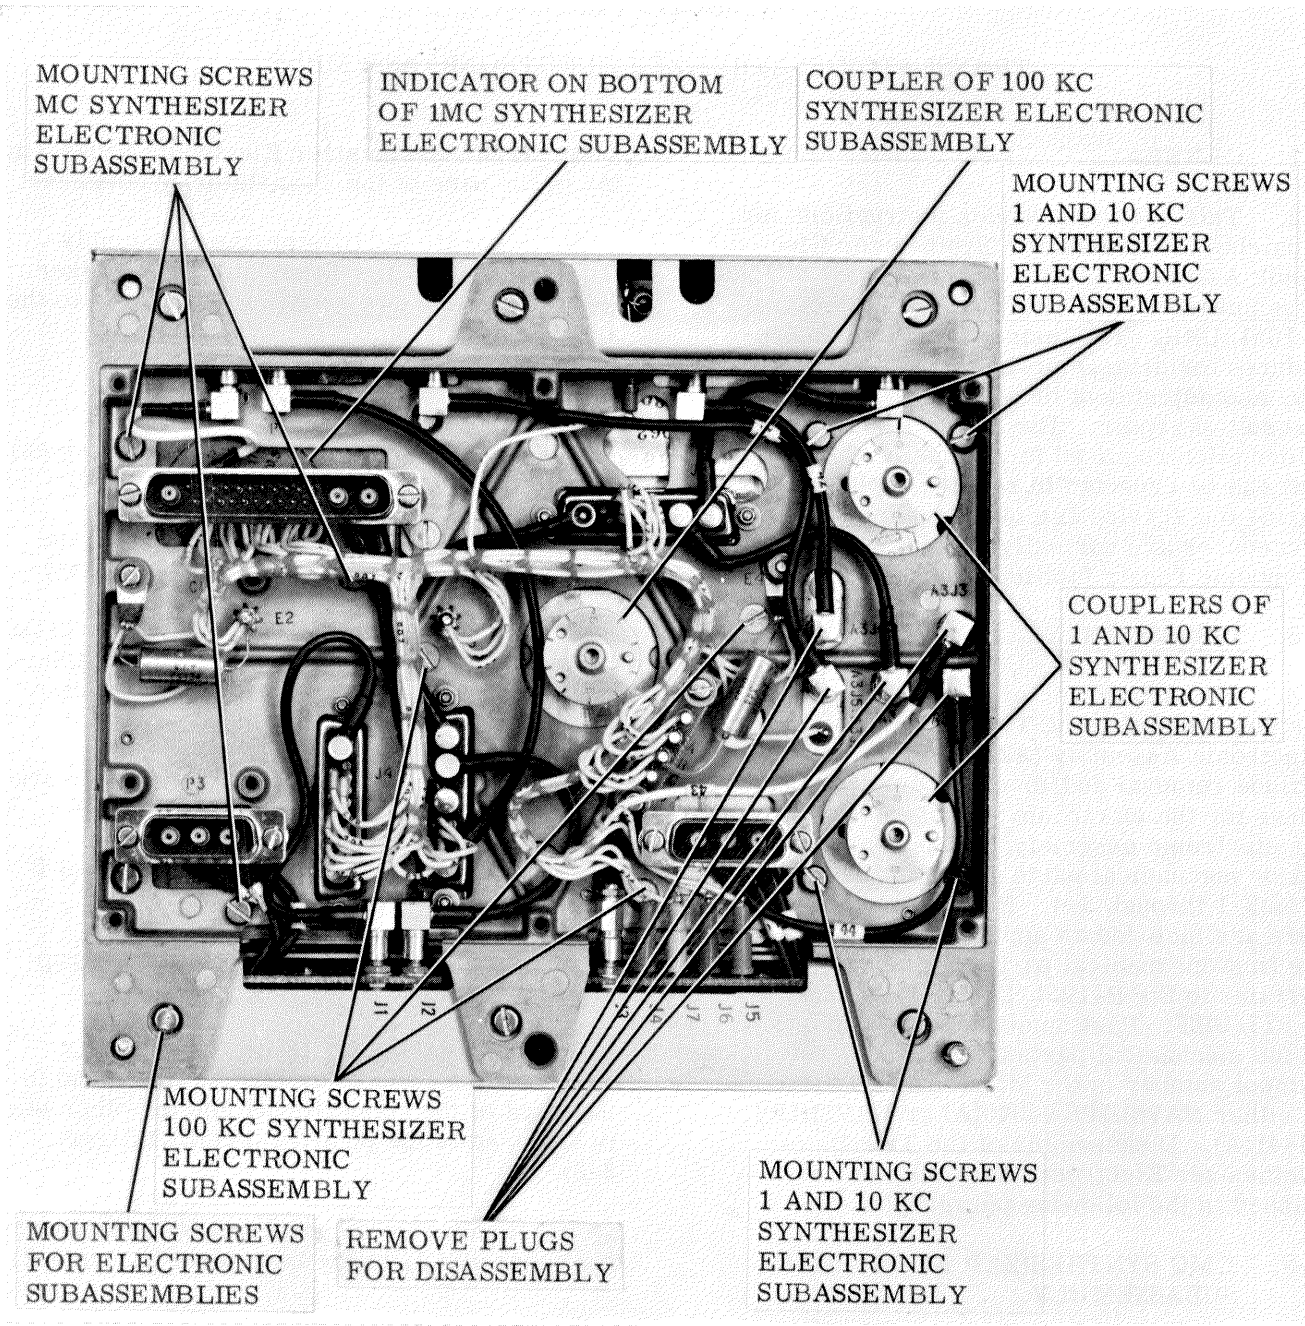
Translator/Synthesizer Electronic Assembly, Bottom View
